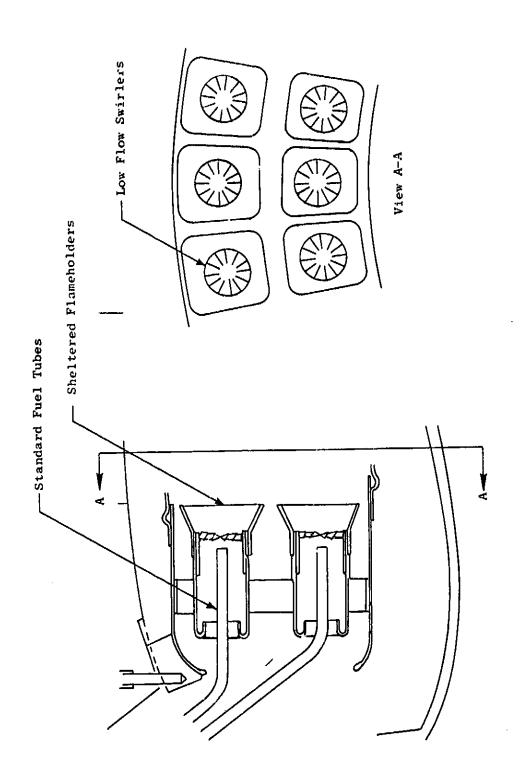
90-Swirl-Can/Sheltered Flameholder Combustor Design.
